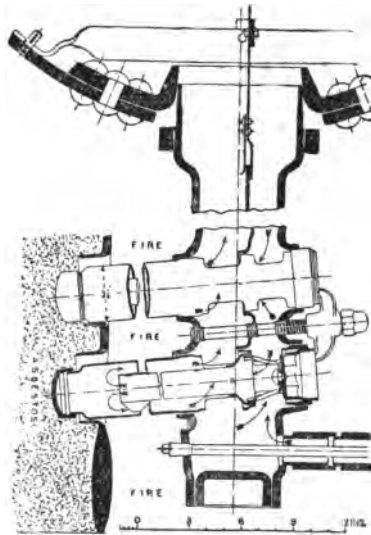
Header and evaporating tube ends of Niclausse boiler.
